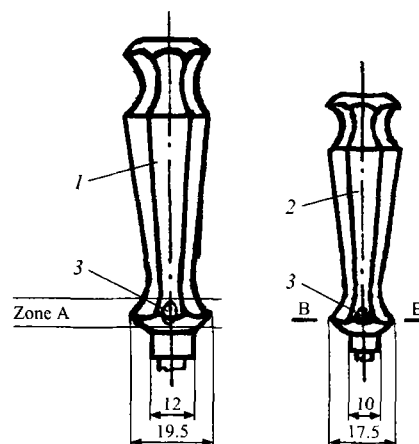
Stem configuration: 1) tall wine glass stem; 2) wine glass stem; 3) vacuum bead.
